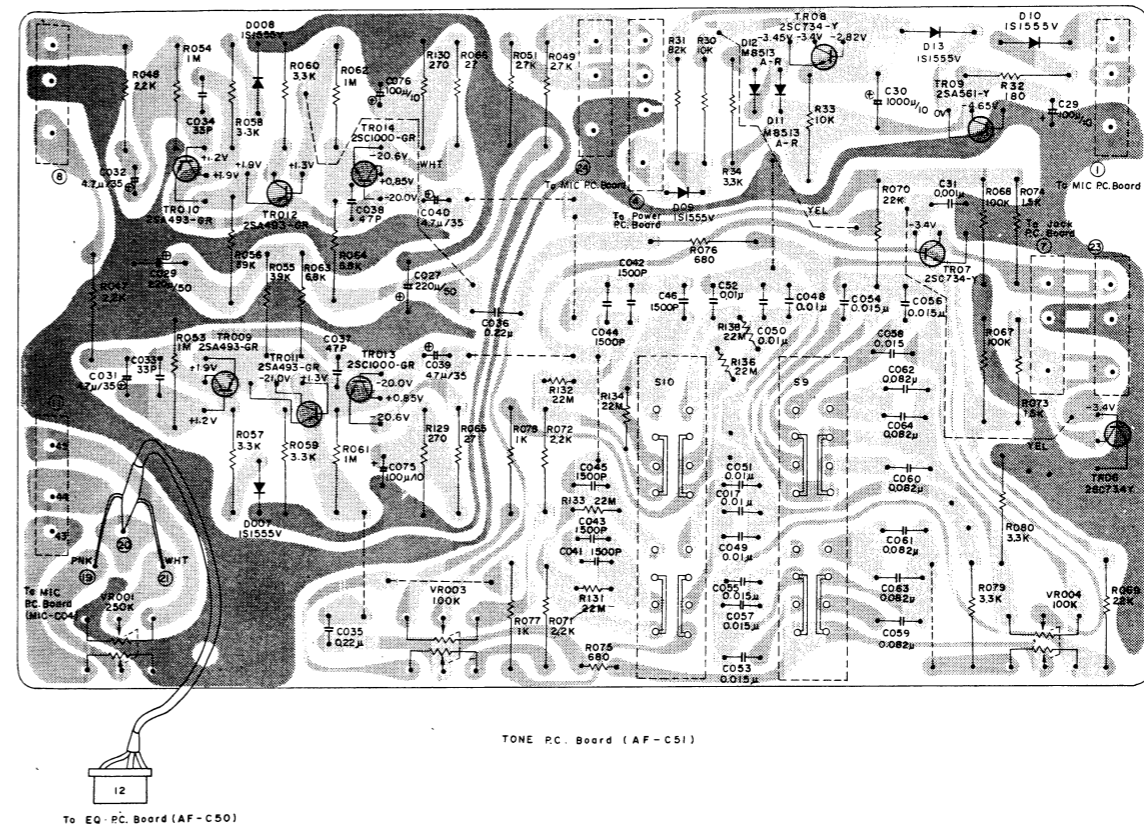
Bottom View of Tone Amp. P.C. Board (CCT-AF-C51).
